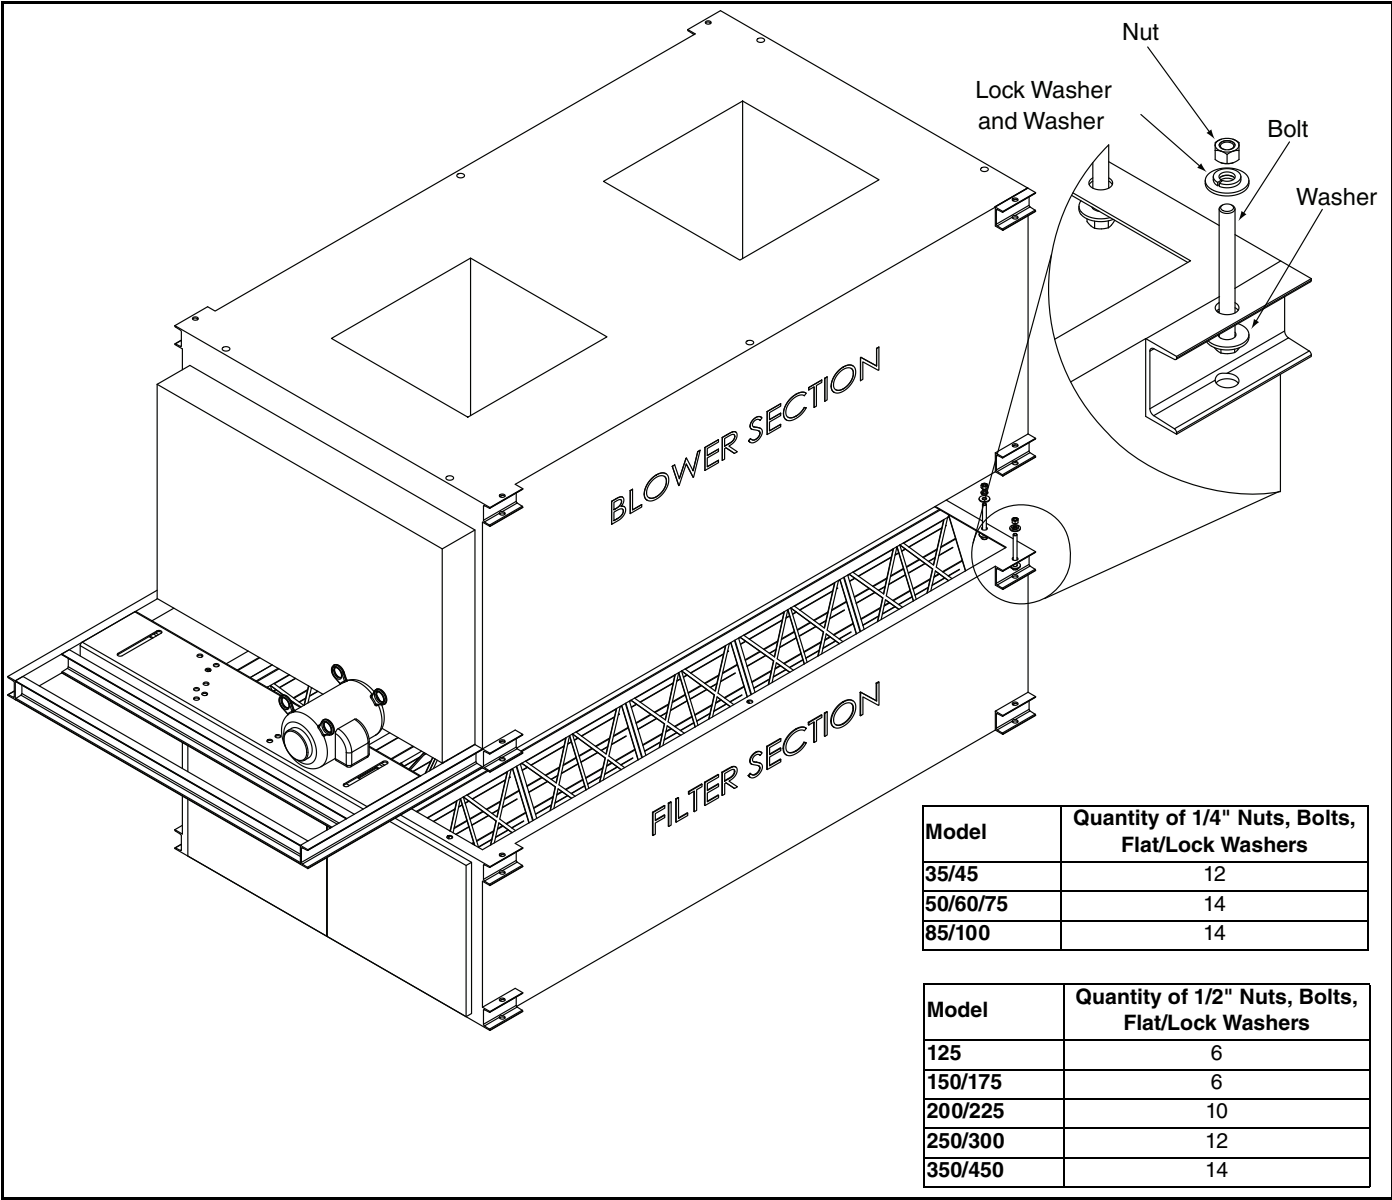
Filter Section Installation on Horizontal Air Handler
